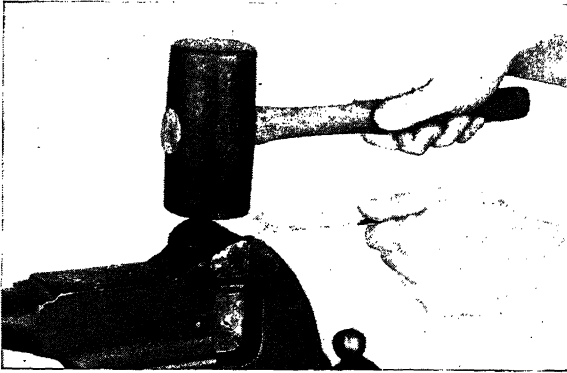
A vise and mallet are useful for bending small pieces at right angles
